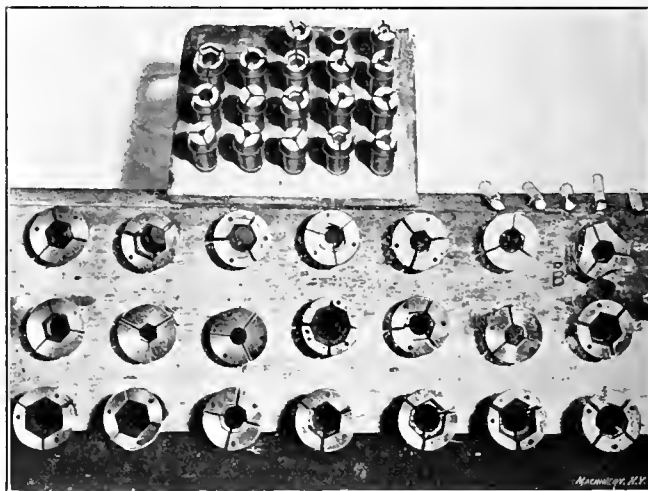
Collets of Various Sizes and Broaching Tools used in making them.
